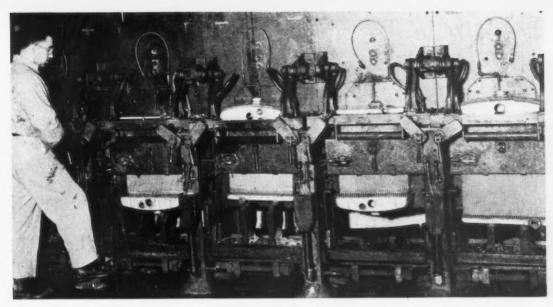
Special six station fixture for performing two separate soldering operations on three different types of trac-
